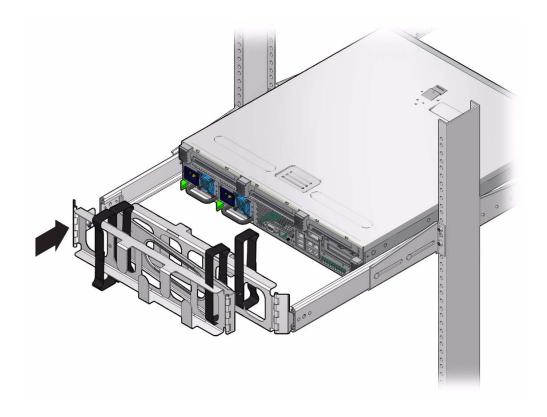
Attaching Cable Management Arm to Right Side
